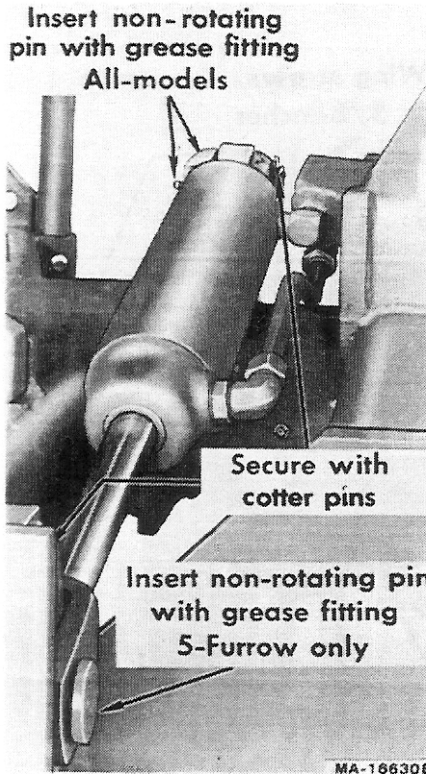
Four Furrow Hydraulic Reset Trip Shown
